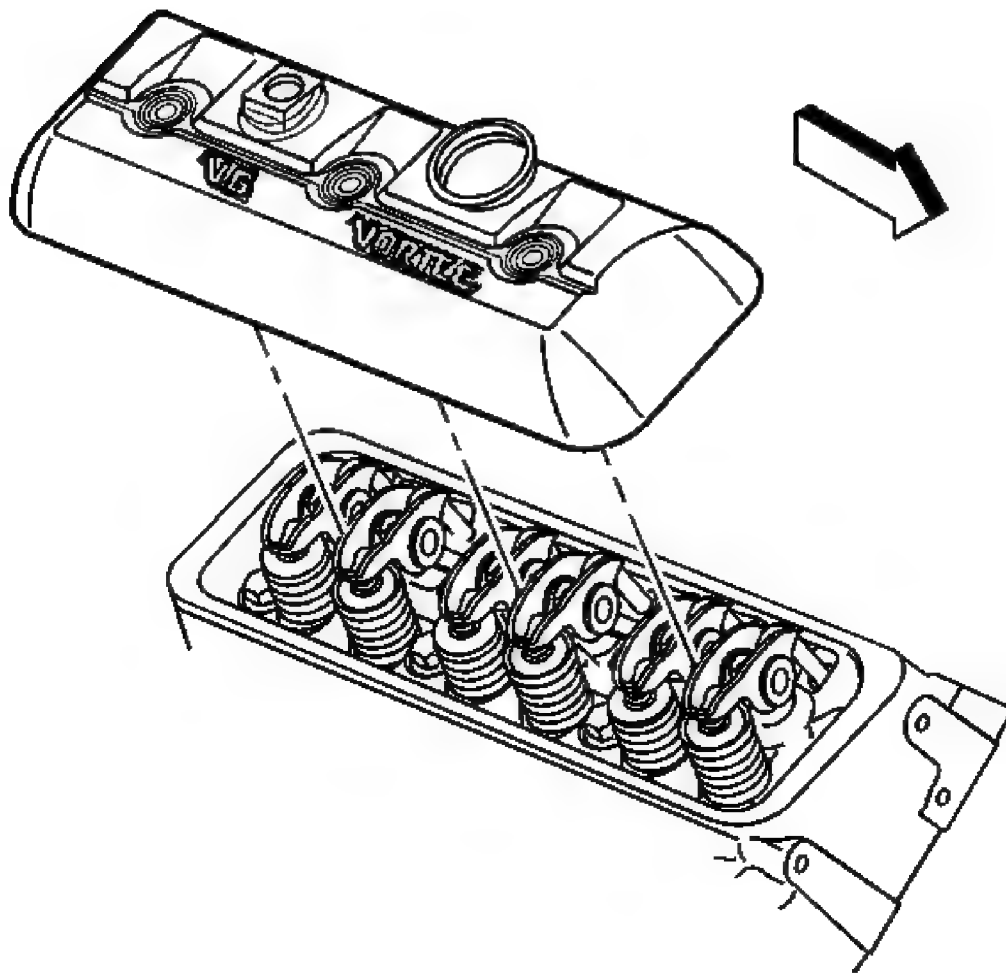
View Of Valve Rocker Arm Cover (Right)
